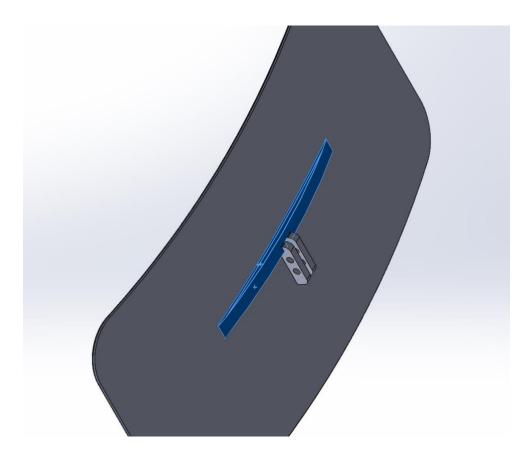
addition of supporting beam on the panel's underside is highlighted in blue.
